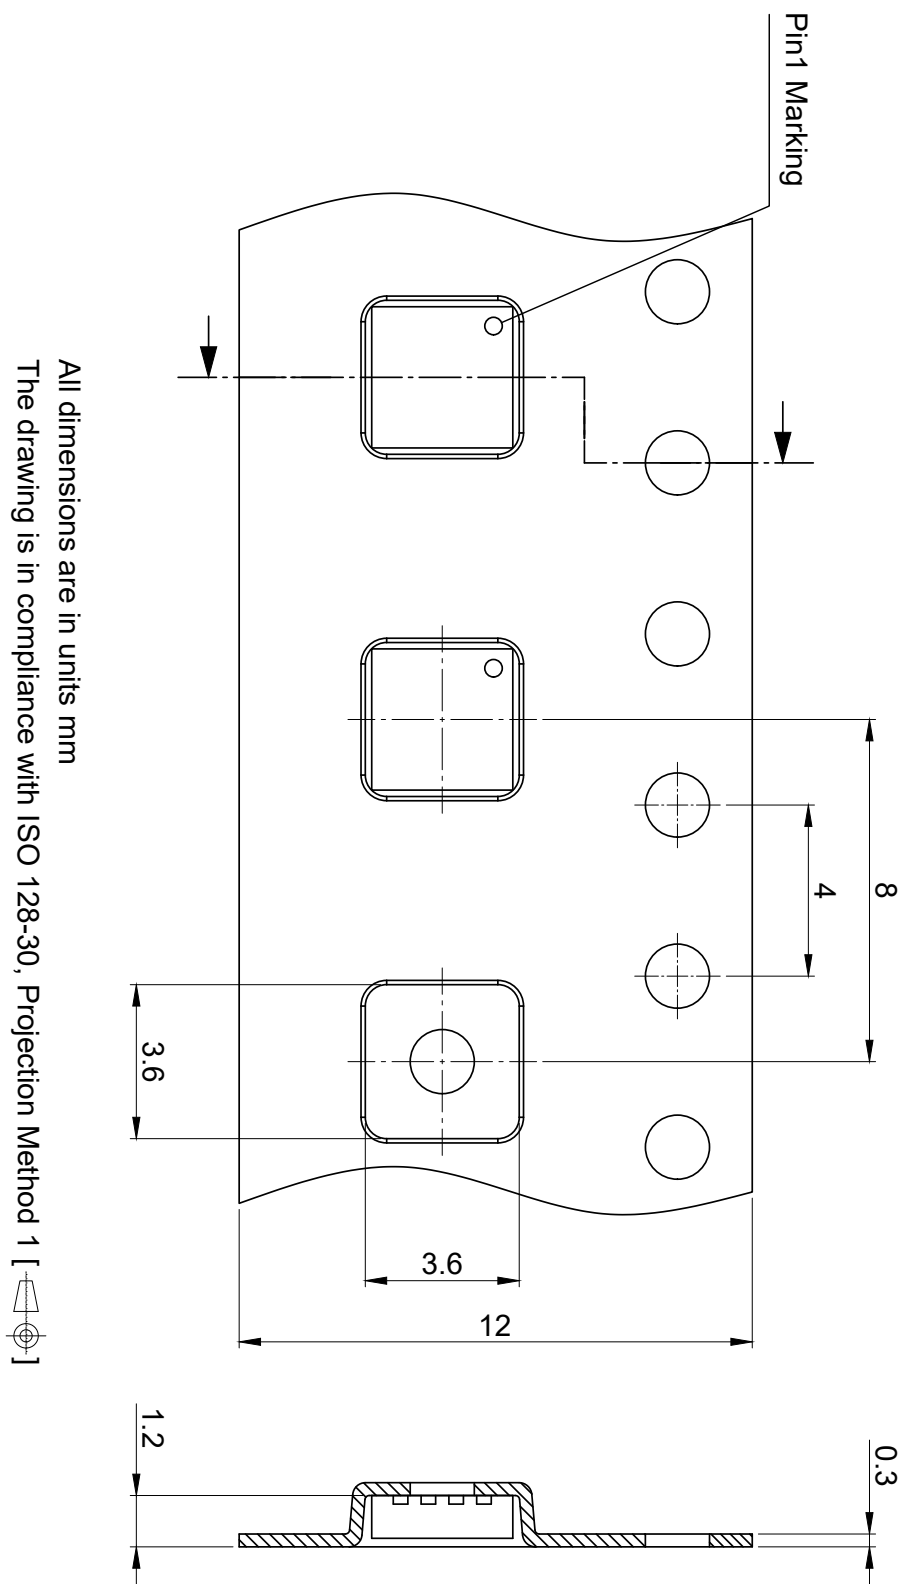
Outline Tape (PG-WHTFN-9-1), dimensions in mm
